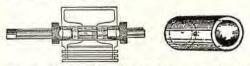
An adjustable piston-pin hole reamer. This adjustable, piloted reamer is shown just finishing one side and entering the other. Two tapper plug pilots hold the reamer bar firmly and in proper line.
